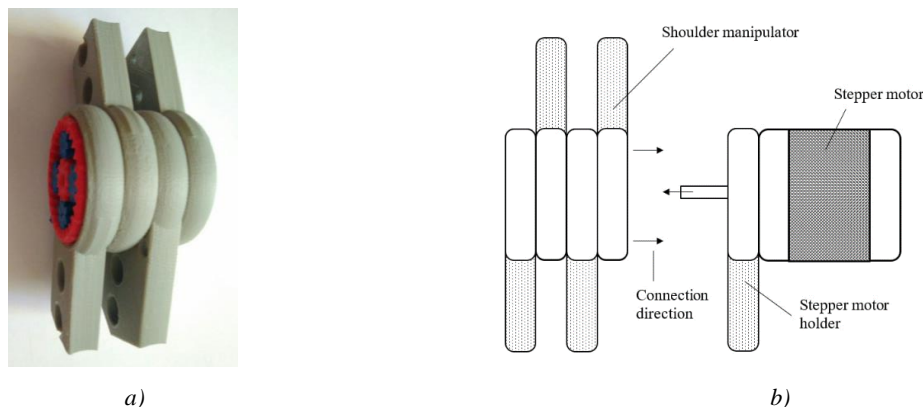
Manipulator joint assembled with reducer (a); principle of stepper motor attachment to the reducer (b)
